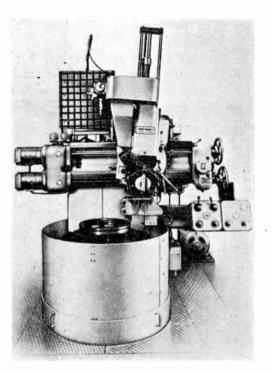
Webster & Bennett boring mill showing two servo motors to the left and the sensing head mounted on the upper part of the tool carriage.
